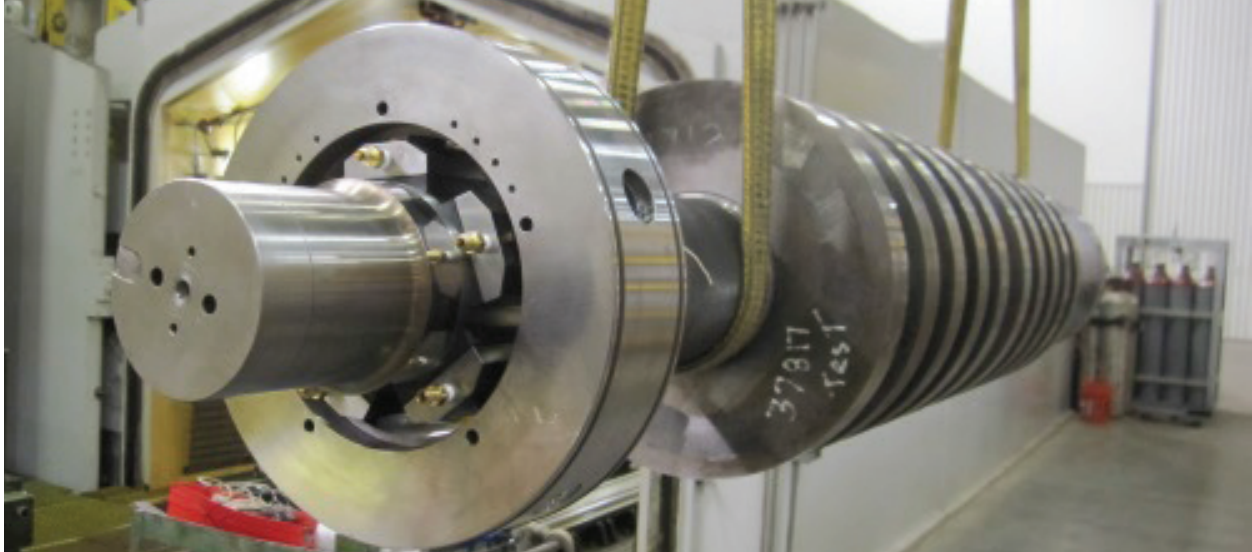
Dresser Rand test rotor mounted on New Way Gas Bearings at the TurboCare Balance Bunker in Houston, TX.
